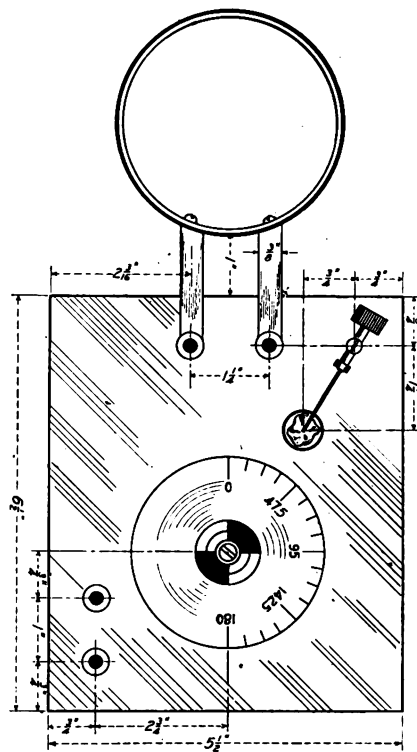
represents the top of the wave meter, assembled, showing the position of the coil and parts with correct dimensions. Suggested by Frederick J. Rumford. Drawn by S. Newman.
